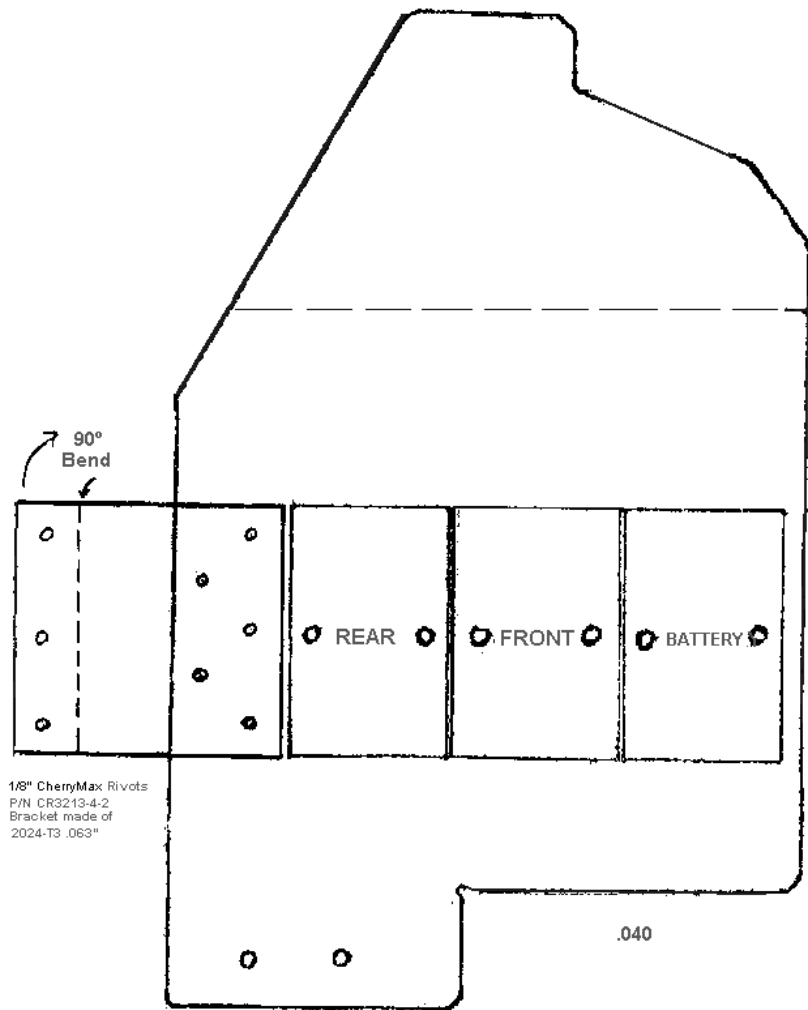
T3 .040 Sheet Metal Shunt Mounting Base with Stiffner Bracket.
